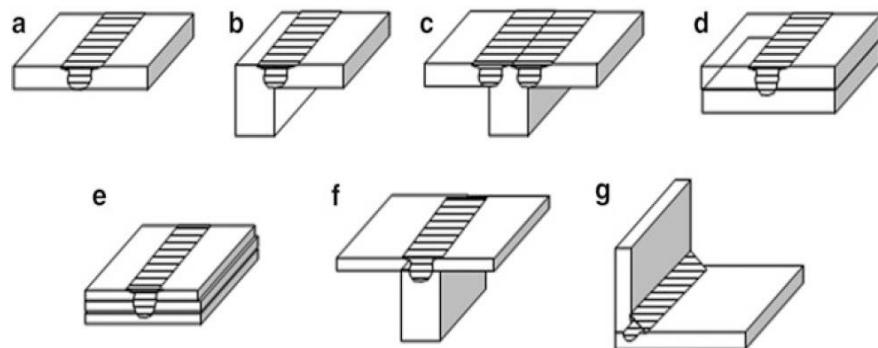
Joint configurations for FSW: (a) square butt; (b) edge butt; (c)T butt joint; (d) lap joint; (e)multiple lap joint; (f) T lap joint; (g)fillet joint (courtesy of Elsevier, 2005)
